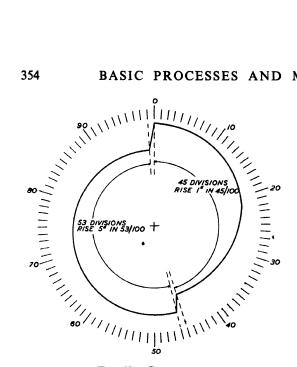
CAM LAYOUT Showing two rises of different dimensions.
